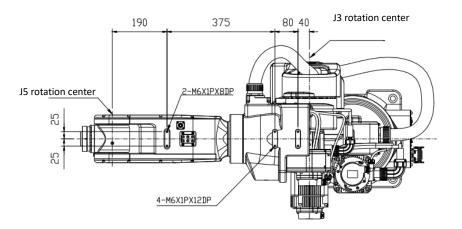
Mounting surfaces on the robot arm (RA620-1621)
